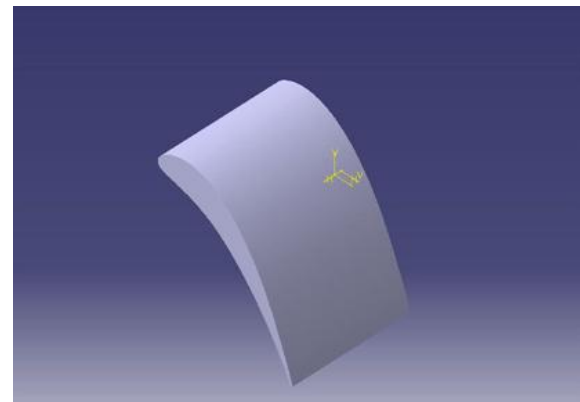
isometric view of the patented aero foil After that hole of circular shapes has been imparted throughout the blades leading edge from the plenum hole shown in fig.3.3
